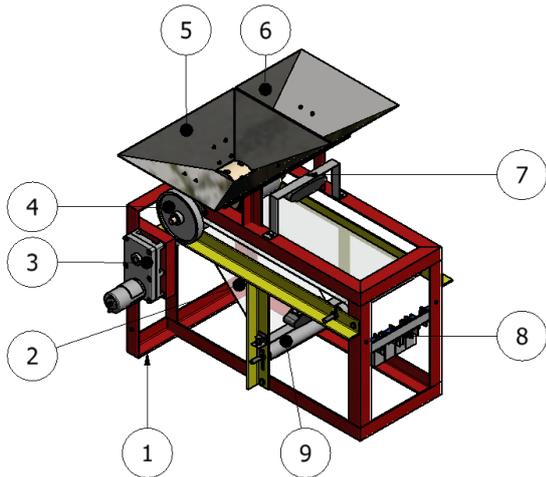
Subsystem of grading by defects: 1) frame, 2) conveyor belt, 3) DC motor, 4) gear transmission, 5) medium grains hopper, 6) large grains hopper, 7) upper camera, 8) arrangement of grading pallets, 9) roller.
